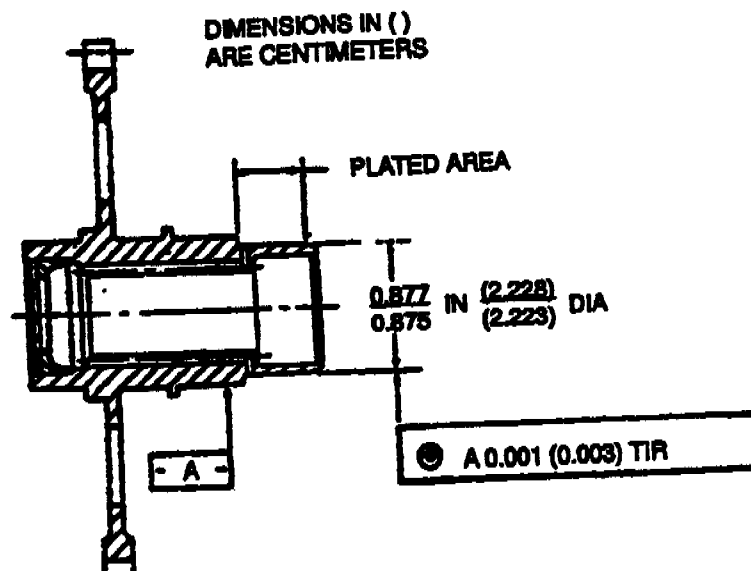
Fuel Control Drive Gearshaft Assembly - Plating Area.
